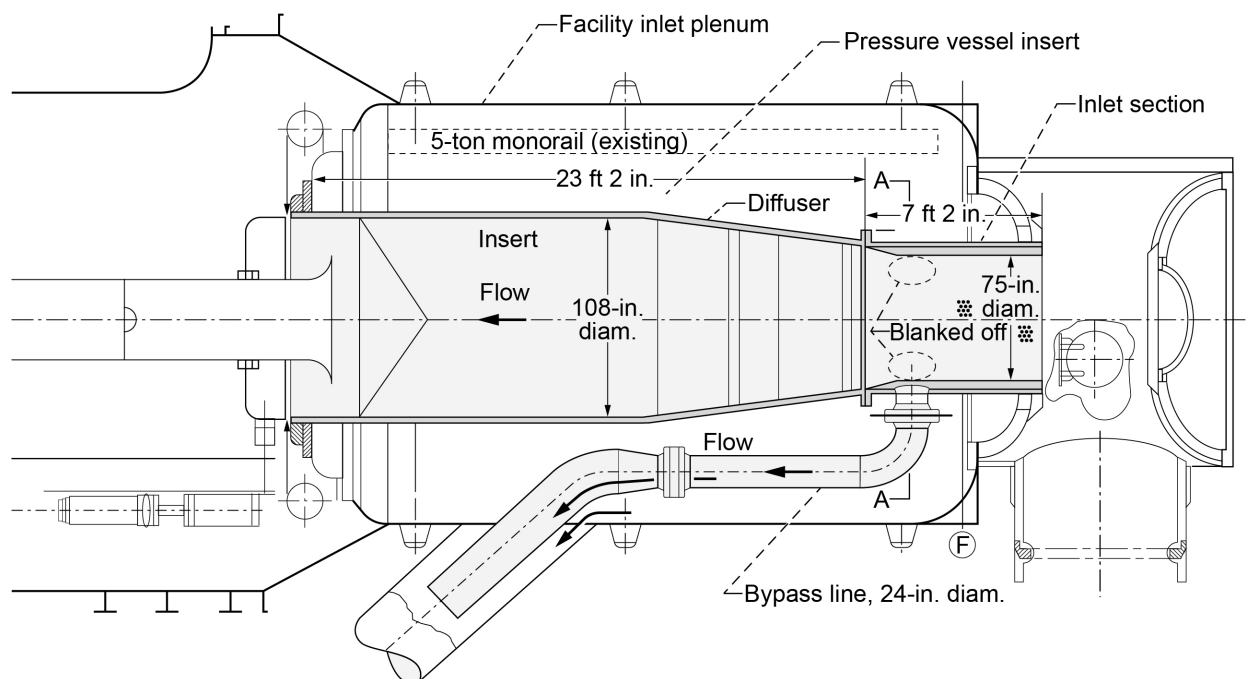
PSL-4 plenum vessel insert configuration for engine core tests.
